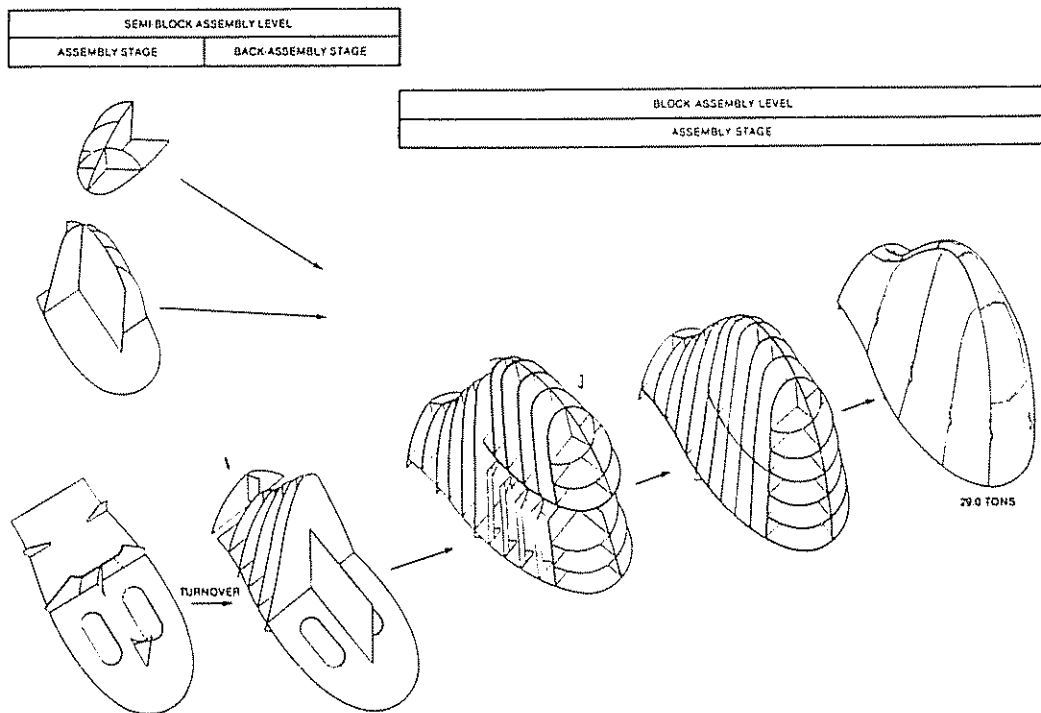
Semi-block and block assembly, showing a bulbous bow
